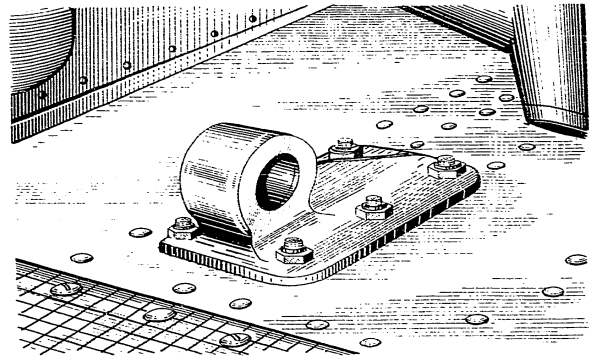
PULLEY BLOCK BRACKET INSTALLED ON CARGO COMPARTMENT FLOOR BETWEEN FRAMES NOS 1 AND 2.
